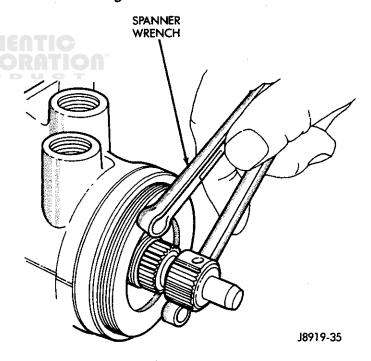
Wormshaft "Preload" Adjustment Cap Removal
